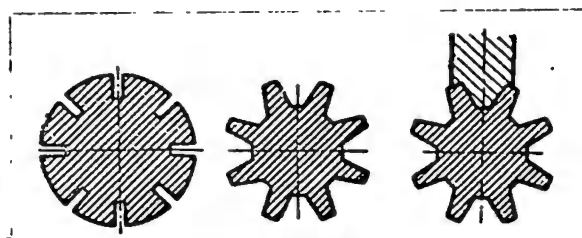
Schematic Sketch of Milling of a Pinion Tooth in Three Passes
